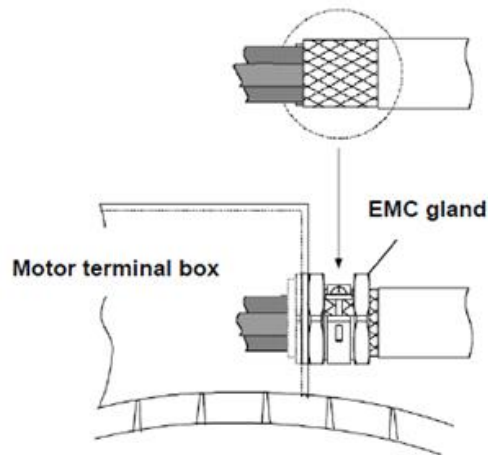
Detail of cable inlet with EMC cable gland at the field equipment.
